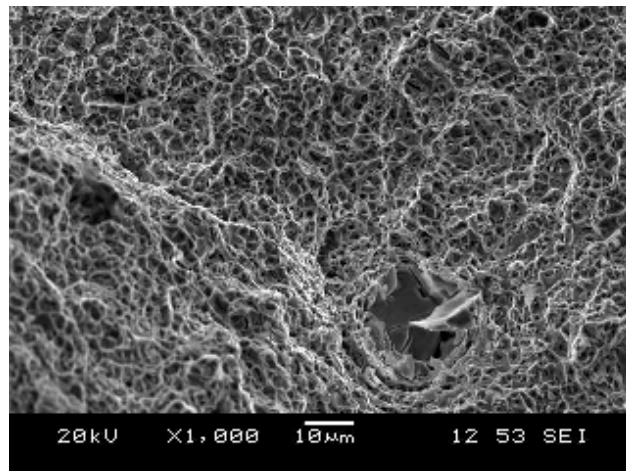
Fracture surface of Incoloy 909 in STA condition
